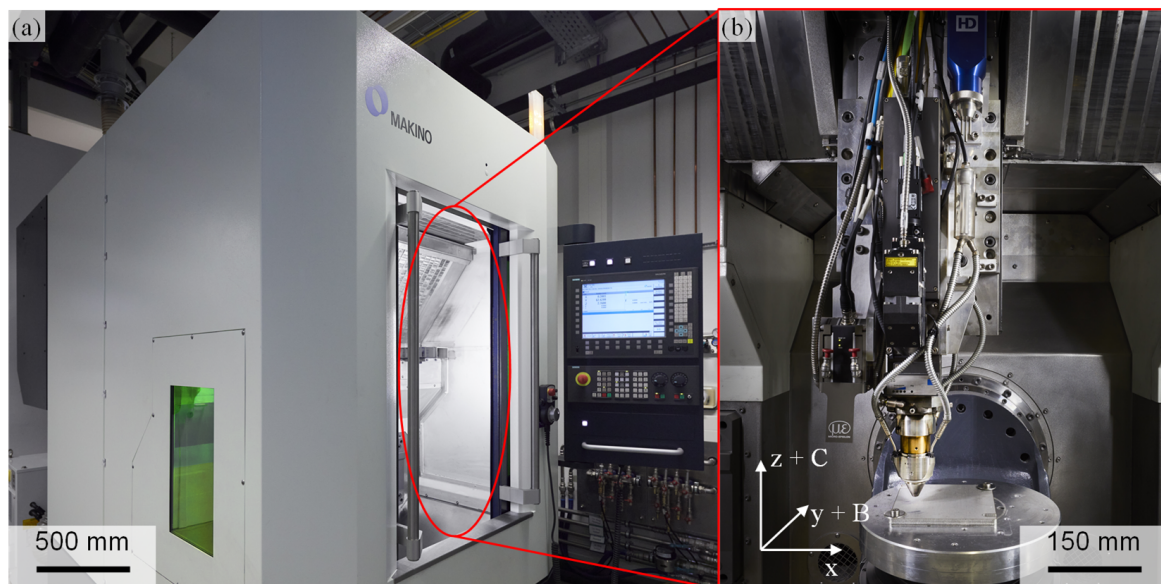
System technology, (a) High-speed 5-axis CNC prototype and (b) machining area with Trumpf Beo D70 processing optics.
